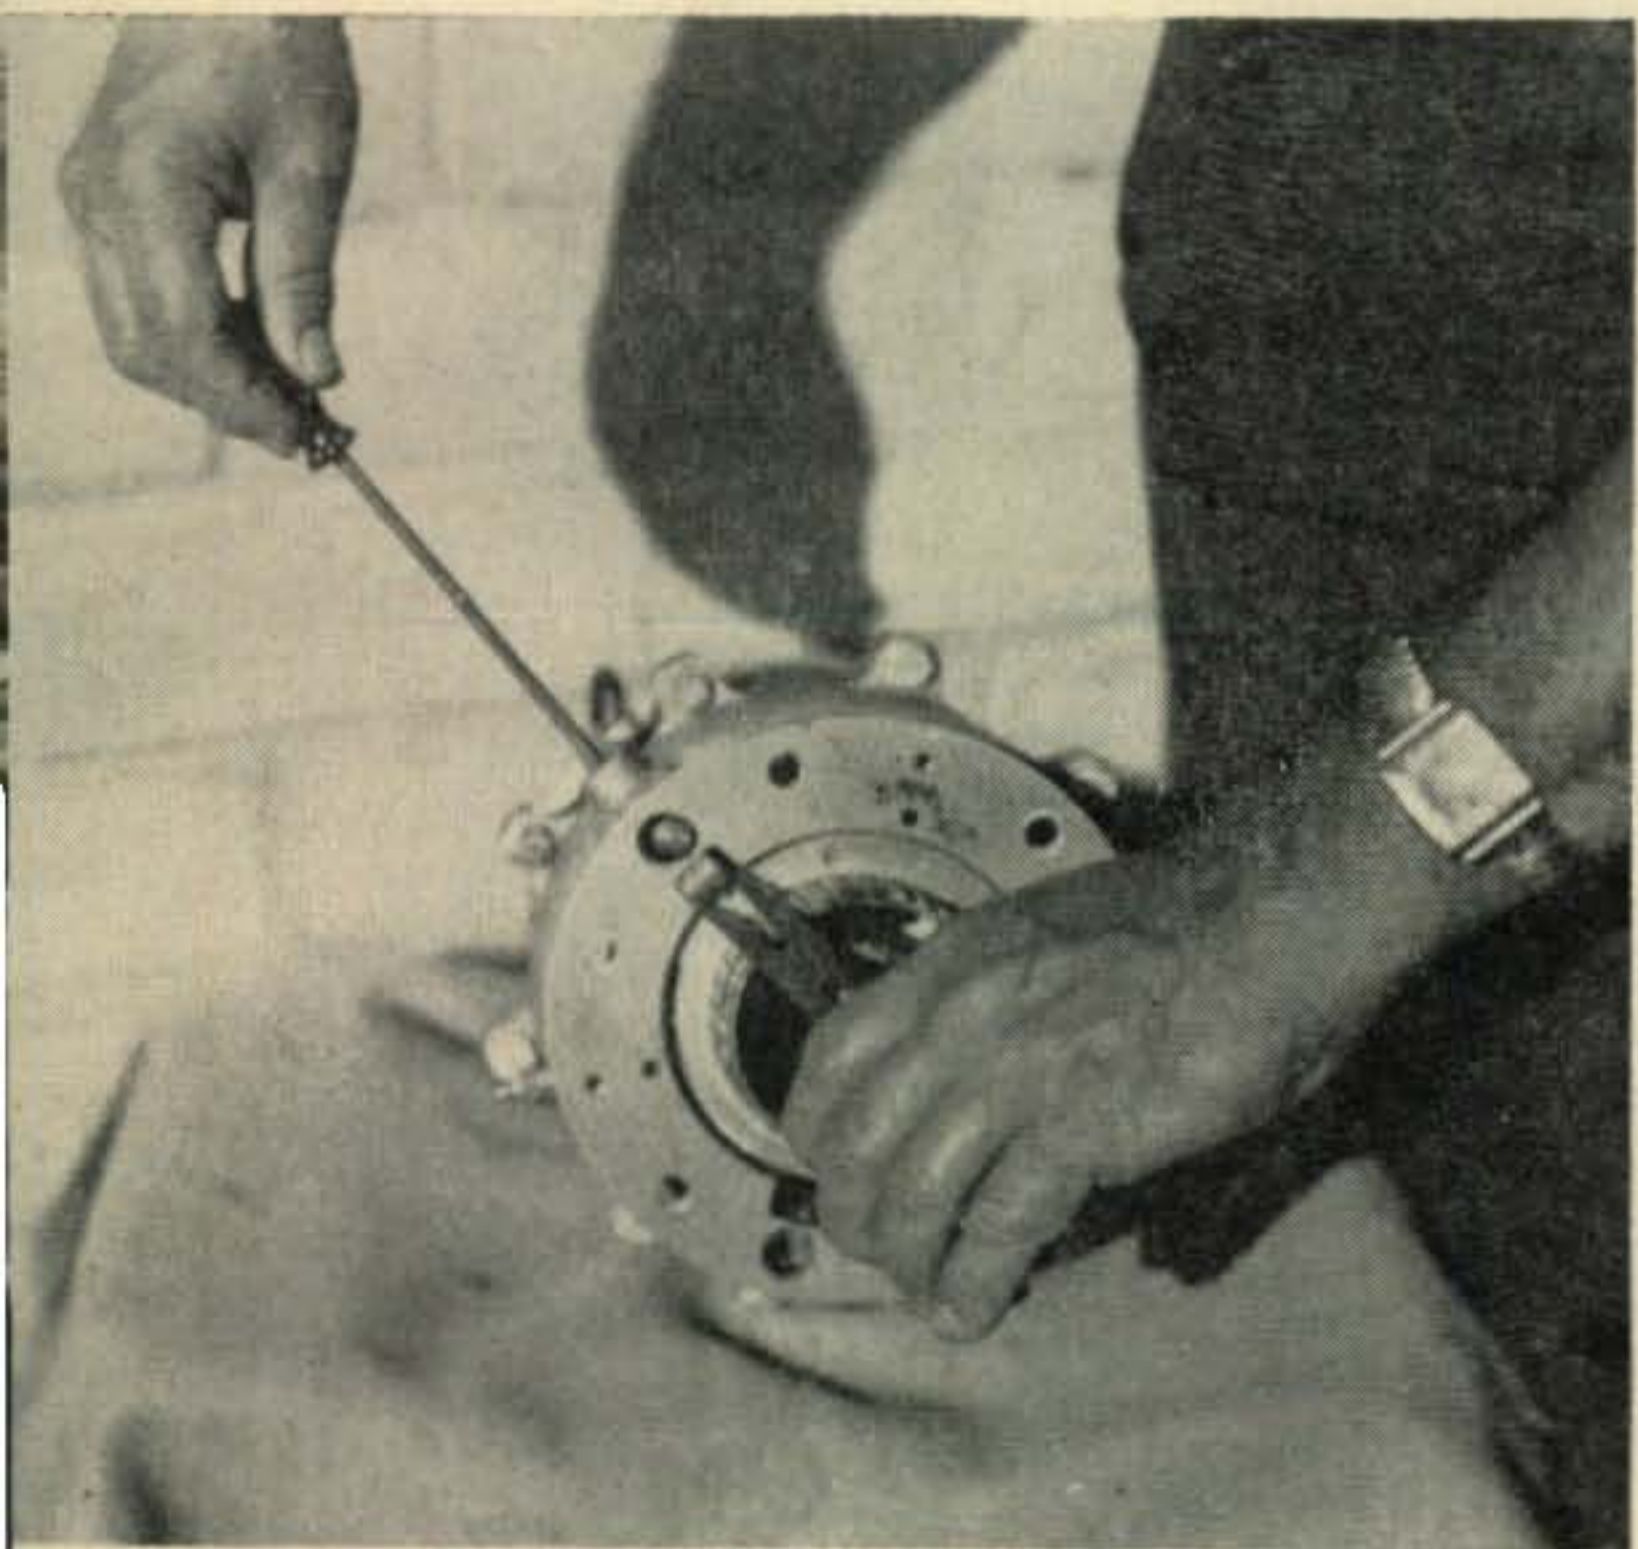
After the wires are out, remove the second screw underneath. After driving the pins which hinge the cam stops out, insert a long nose pliers and pull the cams free. The motor may have to be turned on and the cams rotated for proper clearance. Don't forget to remove the lead shipping stop on the side of the motor before applying voltage.
